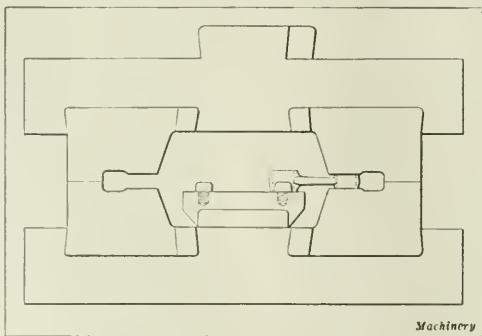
Dies used for cold-forging Ends of Connecting-rod Bearings. Instead of facing the Surfaces
